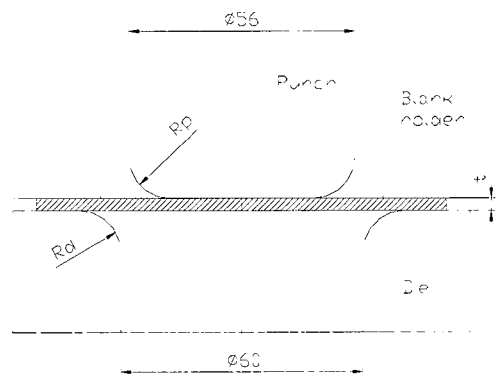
Dimensions of the tools used for the simulation in the first drawing process
